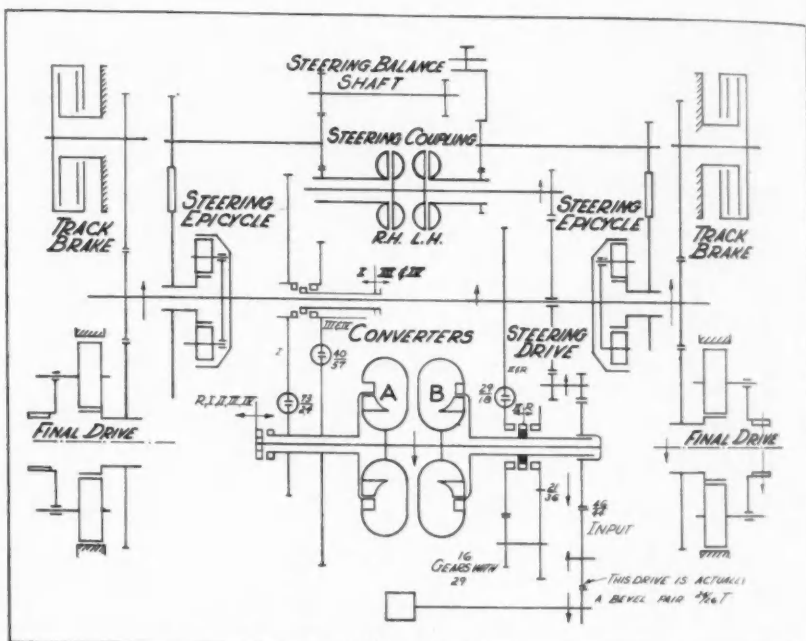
(below) - A torque converter which can be operated as a fluid coupling
